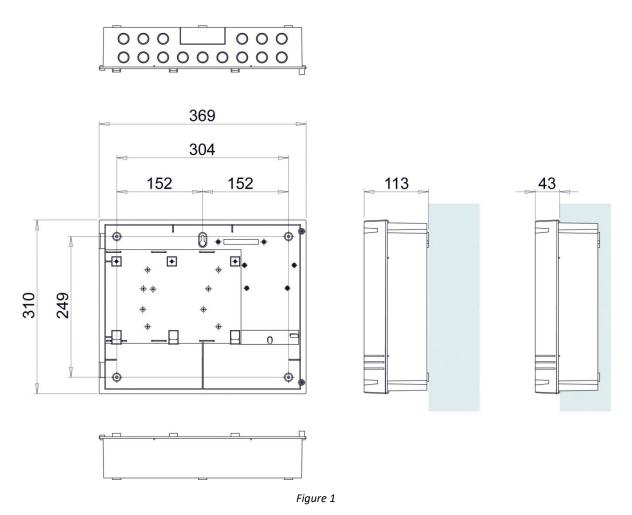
Plan view inside the enclosure without PCBs. Side view for surface installation. (Dimensions: mm)
